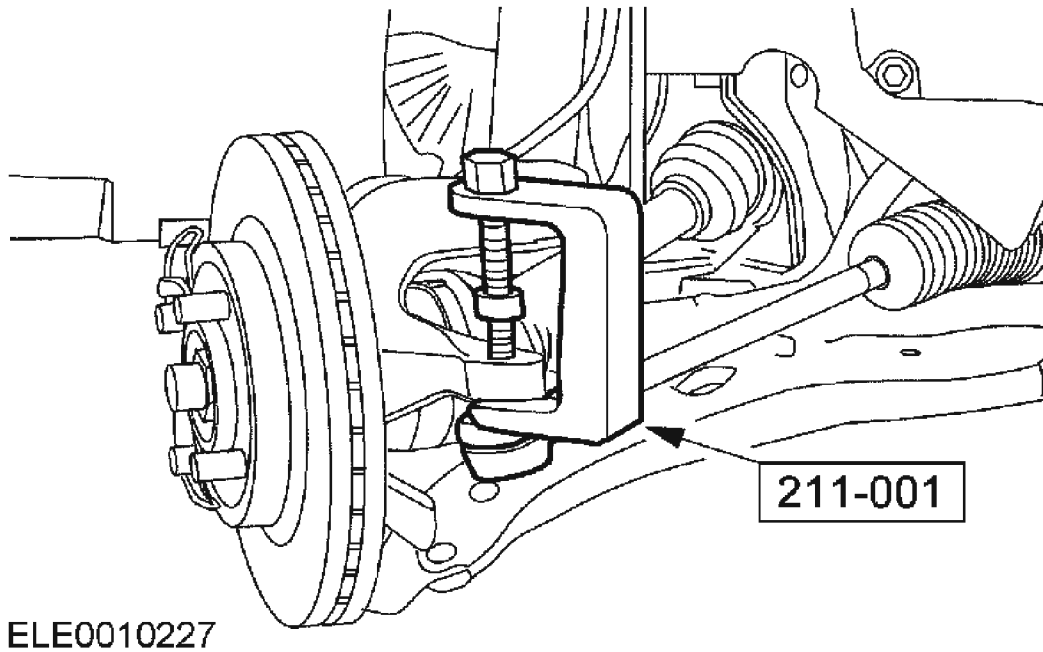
Removing Tie-Rod From Wheel Knuckle Using Special Tool
